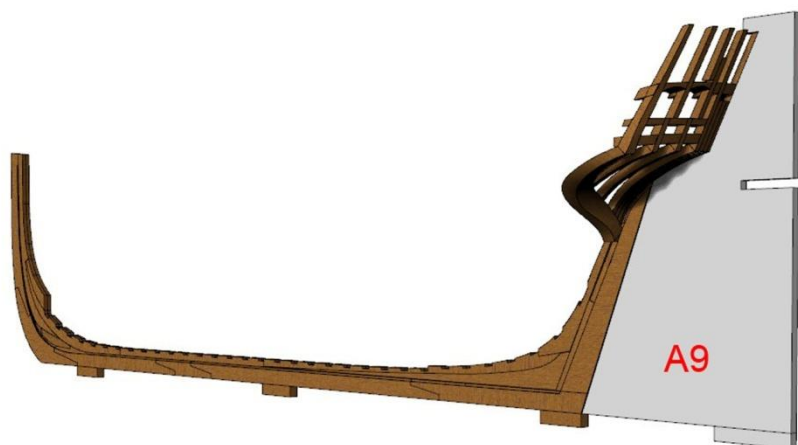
Remove 02-8-b from the wood sheet and sand the mating faces as you have done before , and assemble the parts over the drawing to ensure accuracy. Double check that the assembly is accurate and we cannot stress this enough. Any error in shape will greatly affect subsequent work. All hull frames are constructed using the same methods and repeat until finished. The frames are very delicate at this time so handle them with care and set aside in a safe place.
